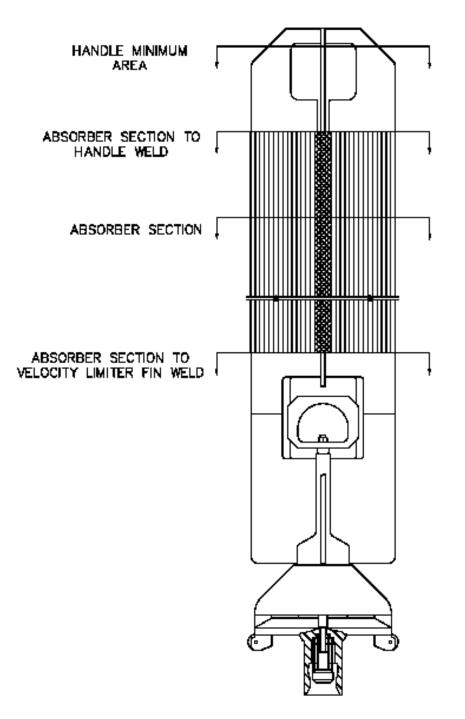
Control Rod Assembly Welds and Cross-Sections Analyzed
